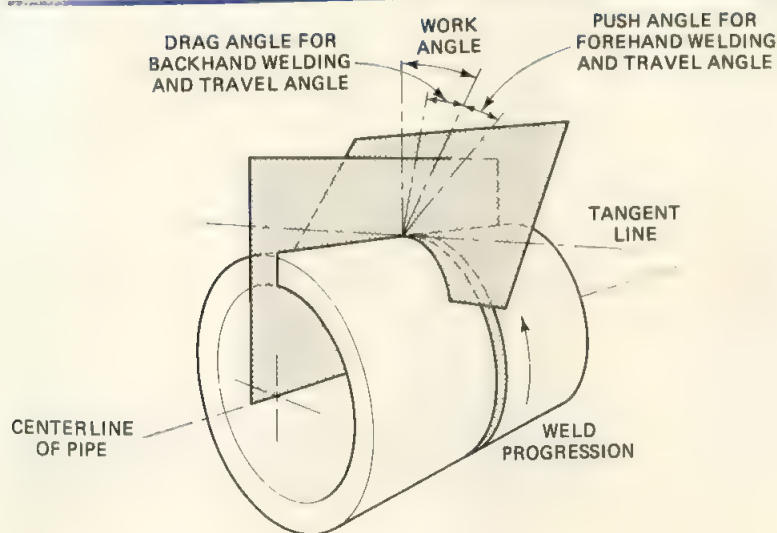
Travel and work angles: pipe welding.
